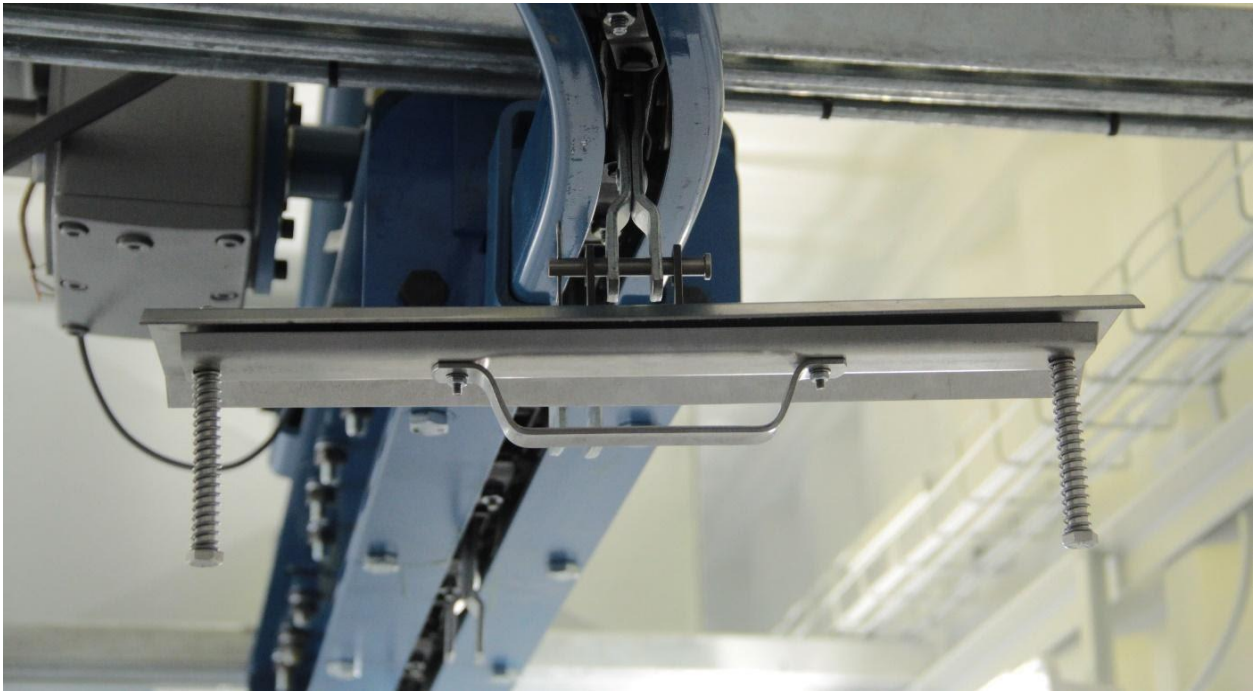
Constructed hanger assembled on conveyor track attachment.
